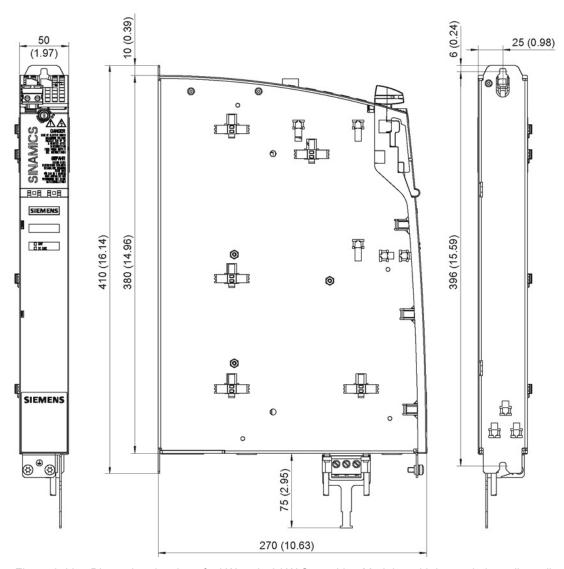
Dimension drawing of 5 kW and 10 kW Smart Line Modules with internal air cooling, all dimensions in mm and (inches)
